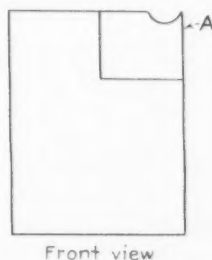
How not to grind a chip breaker groove. The sharp knife edge will quickly crumble.
